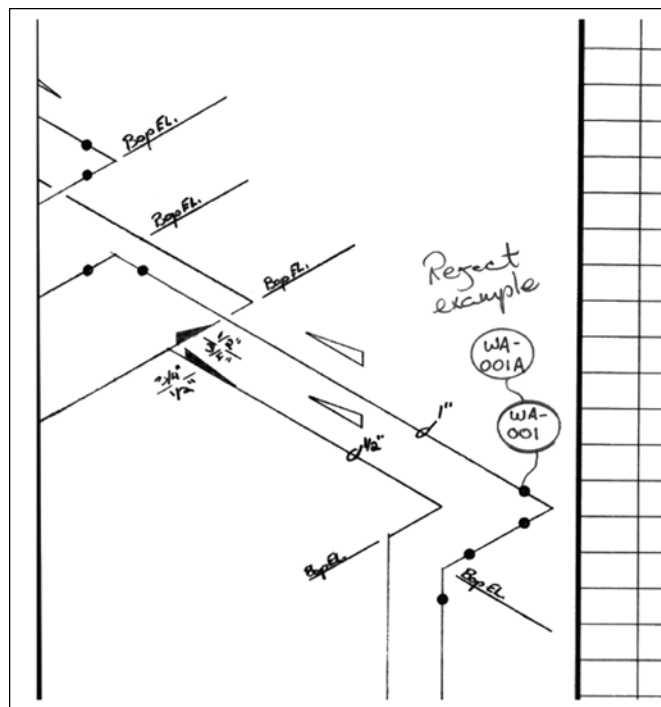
Example of how a rejected weld would be documented on an "iso" drawing. The first weld "window" shows the weld number which is recorded for every weld and the second window indicates that the first weld was cut out, replaced, and the number changed. *Courtesy of Pro-Tech Process, Inc.
